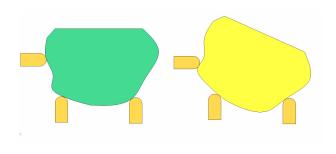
An example of different workpiece poses in fixture while maintaining contact with locators
